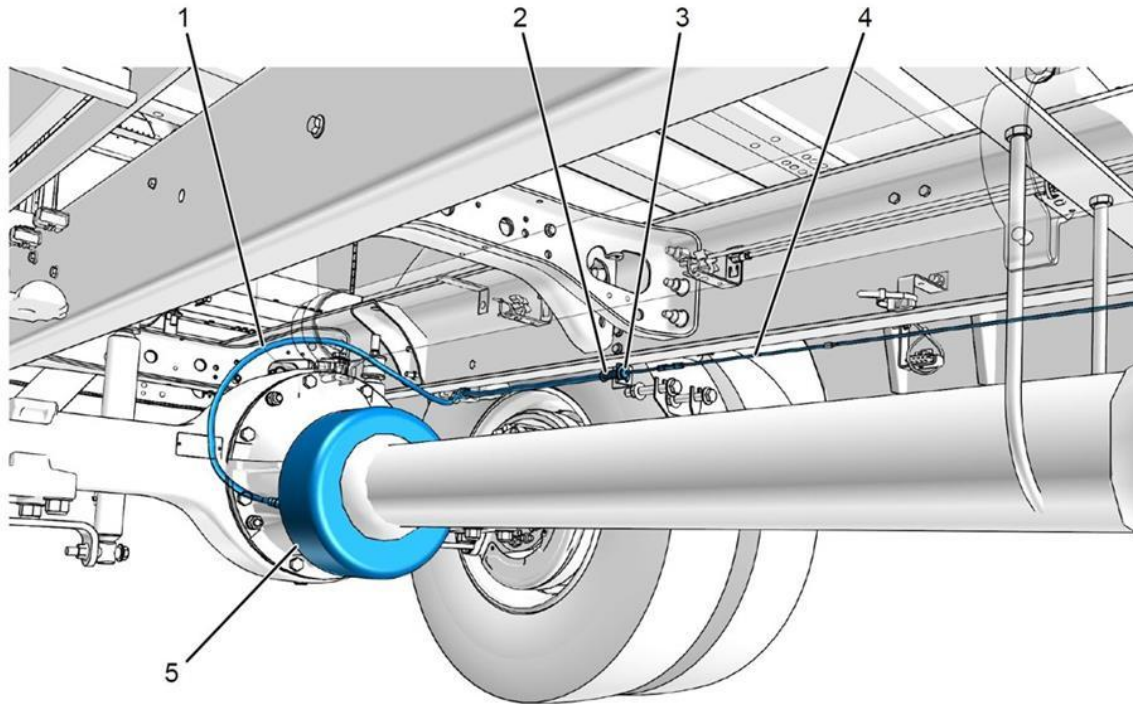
Parking Brake Drum, Rear Cable, Spring, Support Bracket and Intermediate Cable
